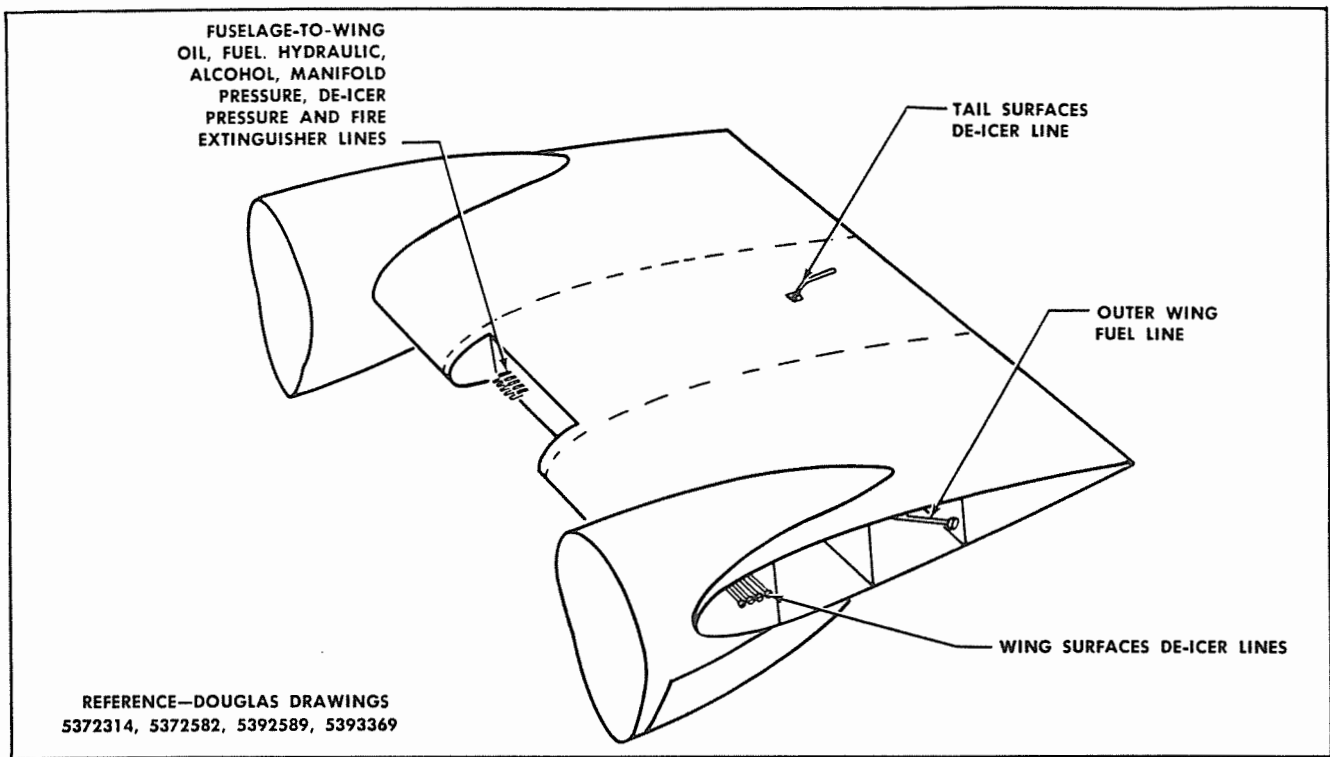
(Sheet 2 of 2 Sheets). Wing Center Section Installation
